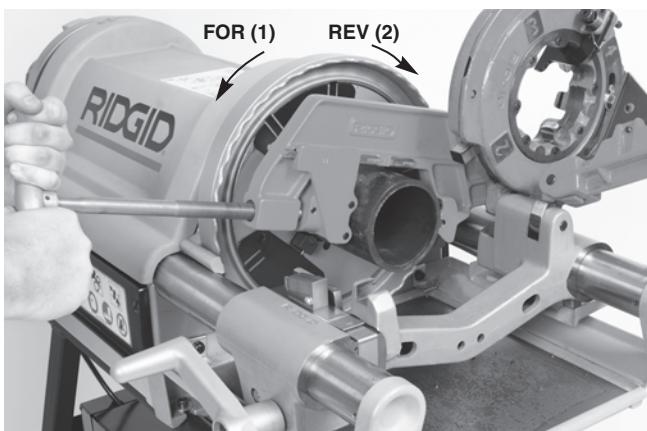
Cutting Pipe with 764 Cutter/Machine Rotation
